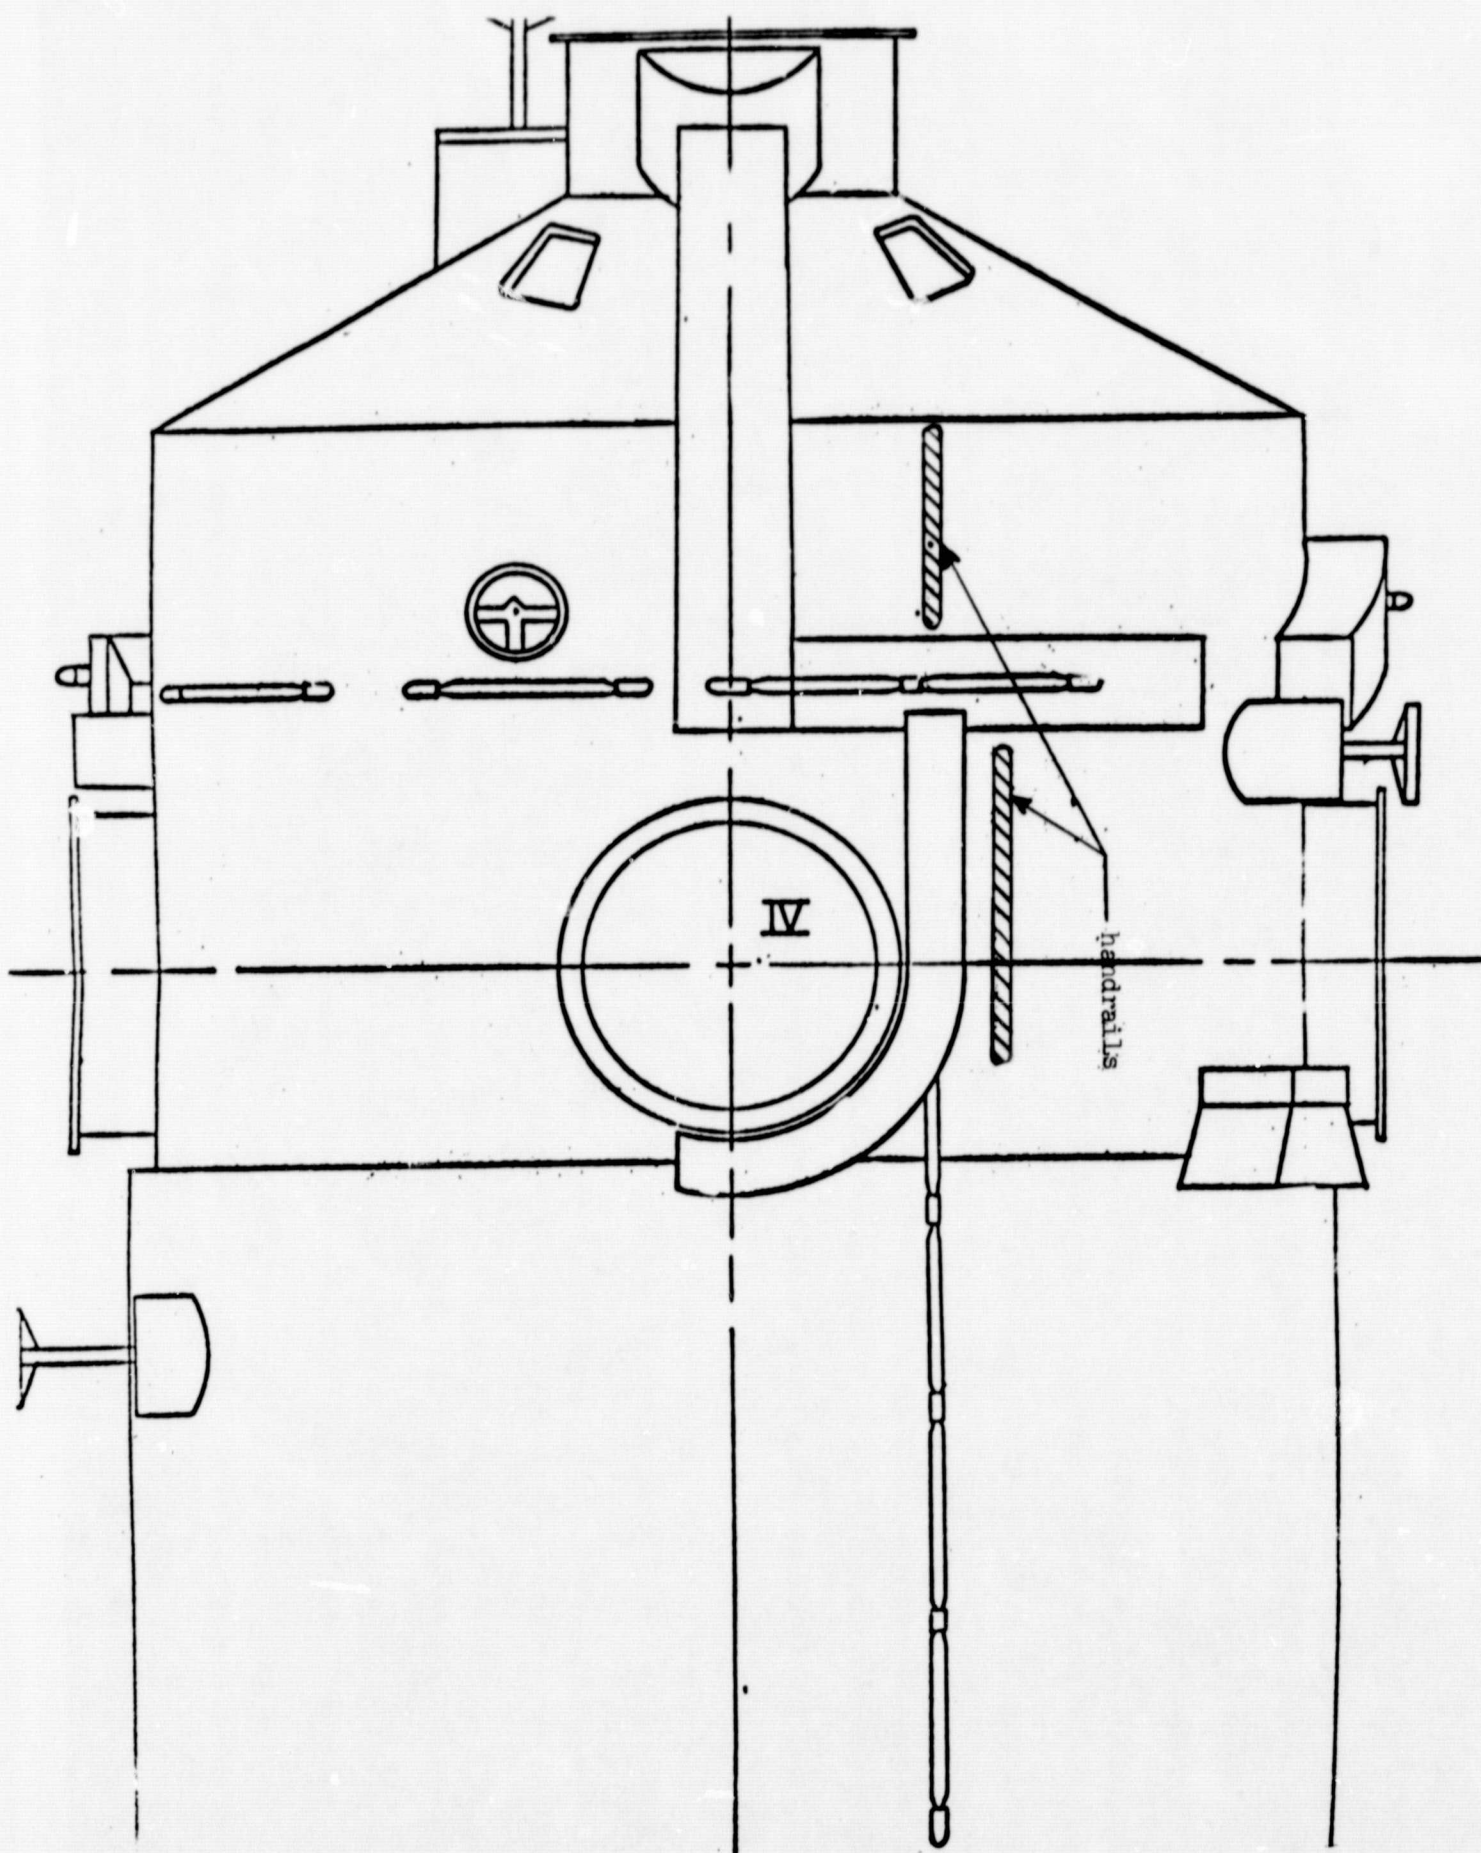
SUGGESTED HANDRAIL EXTENSION FOR LONGITUDINAL HANDRAIL
